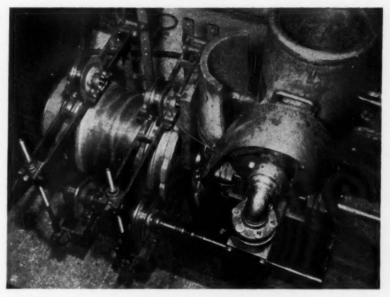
Spin casting mechanism, showing crucible and pouring funnel on right
